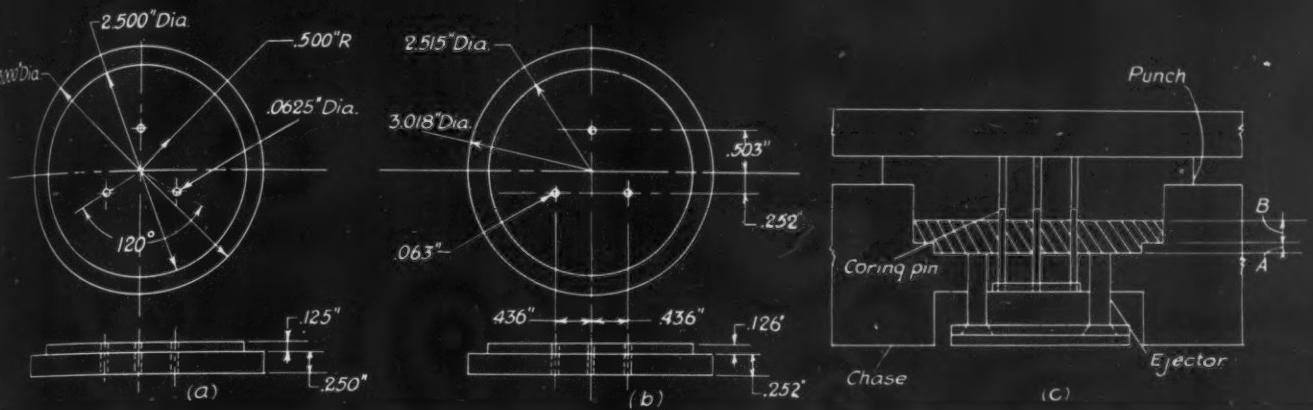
Comparative dimensions of molded part and mold. Part to be molded is indicated at (a), dimensions corrected for shrinkage, at (b) a semipositive mold for producing part at (c)
